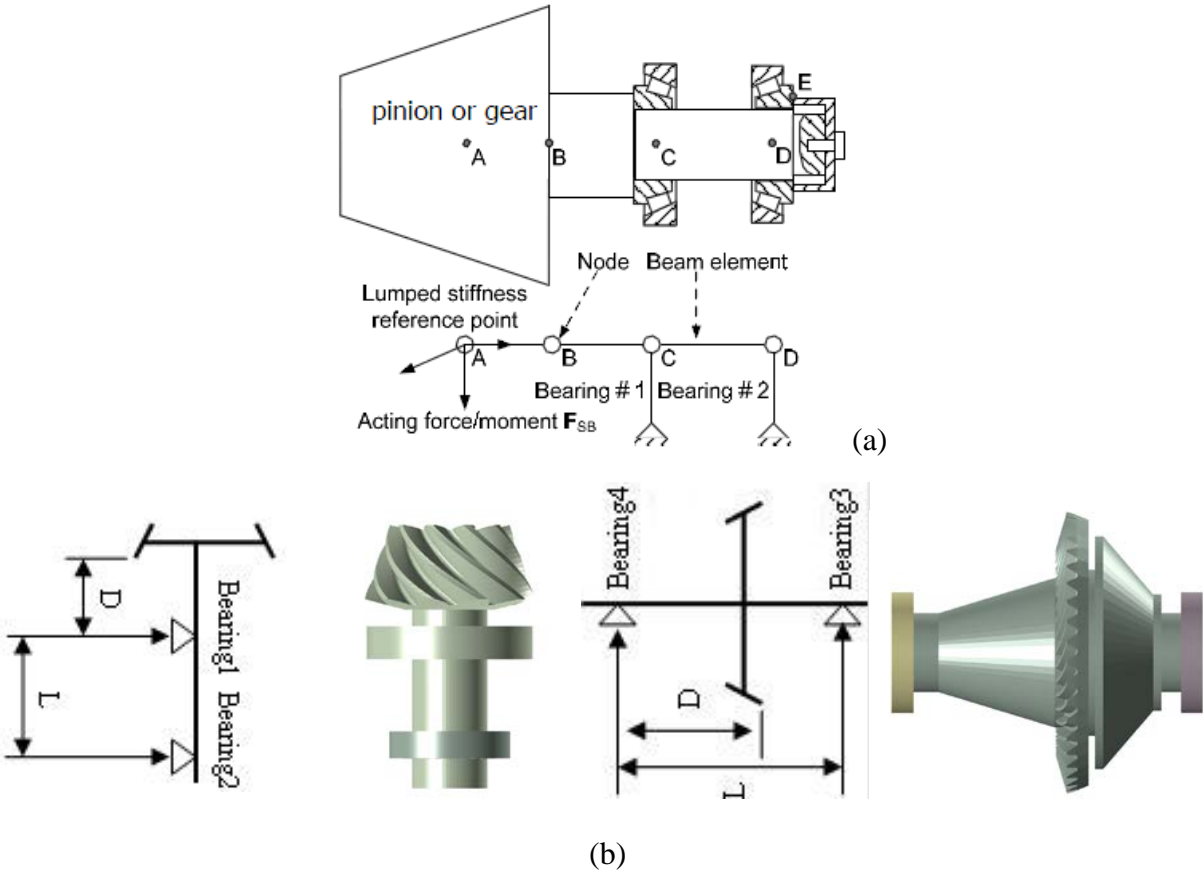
Illustrations of a) shaft-bearing lumped model; b) shaft-bearing layout [4]
